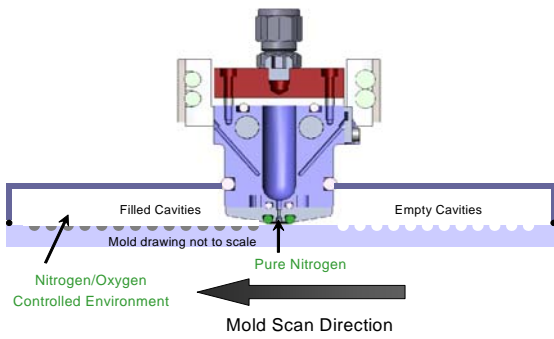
Scan fill head to inject molten solder into cavities of glass mold [18].
